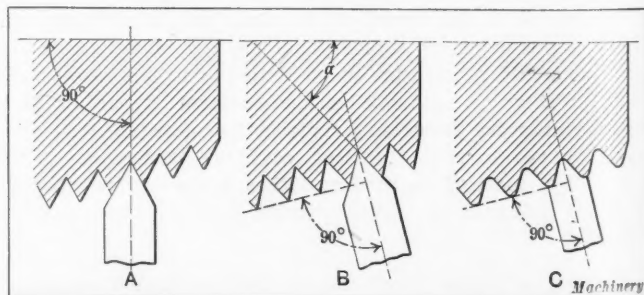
Correct and Incorrect Positions of Tool for Taper Thread Cutting. The tools being spaced according to the pitch of the thread. The Dale multiple-tool holder is shown in Fig. 4. This particular holder is arranged for cutting square threads, although the same general type may be applied to other forms. The main part of the holder A is channeled or grooved to receive the cutting blades or tools. The space between these tools is regulated by the distance piece B, and they are held at an angle by tapering strips C (see end view). This inclination varies, of course, with the pitch and diameter of the screw thread. The tools and strips B and C are held in position by set-screws D. The tapering part E above the tools provides a
